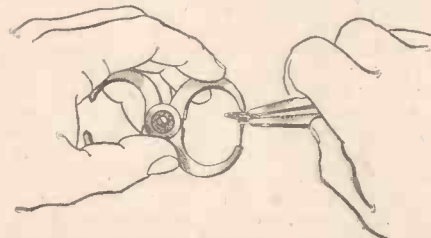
Hold each wheel in a pair of poising calipers to check flatness and concentricity.
